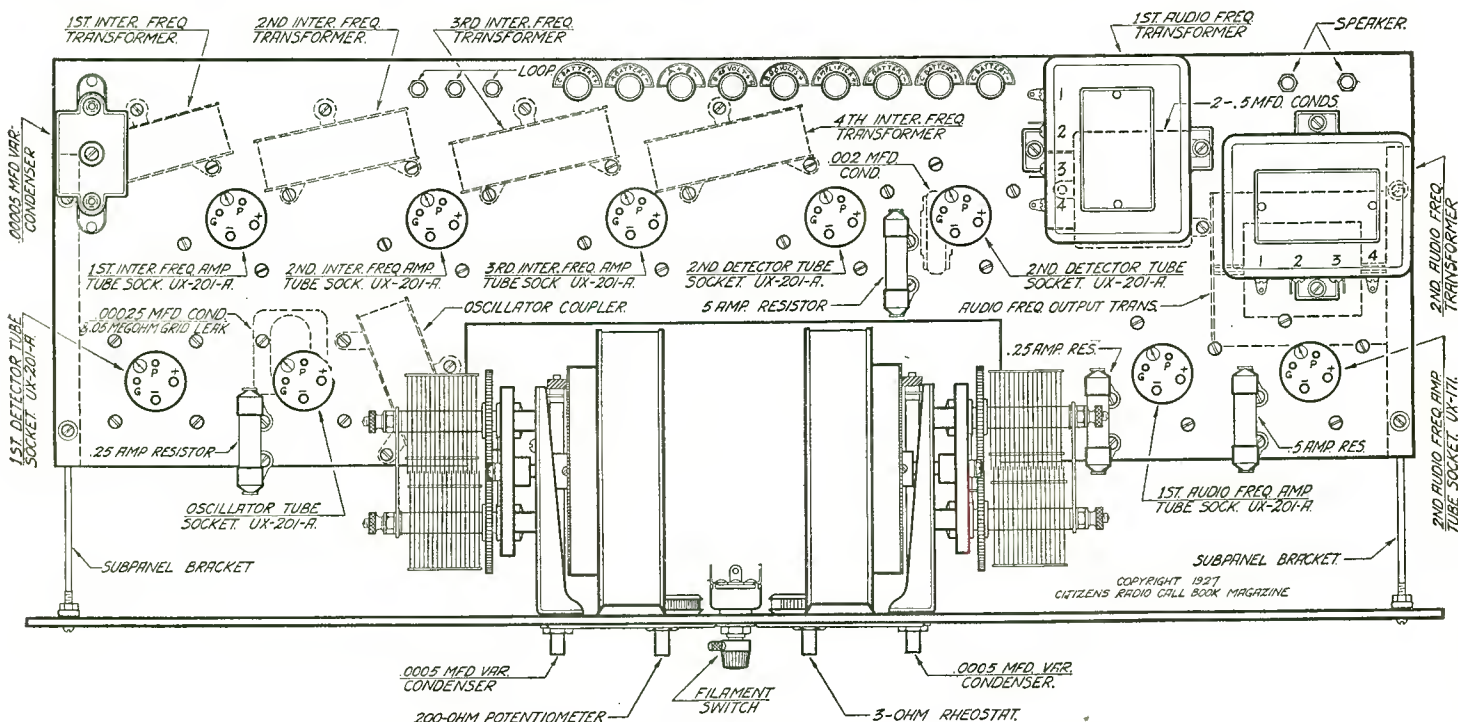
All necessary parts constituting this popular receiver may be found placed in accordance with the illustration shown above. Be sure to follow it for the location of the parts but not for their wiring up
